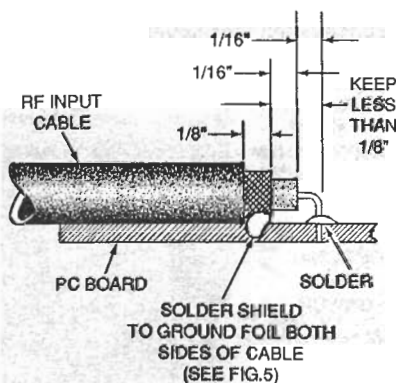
INSTALLATION of RF input cable is critical. Keep recommended dimensions equal to or less than given in diagram, otherwise excessive losses will occur.
